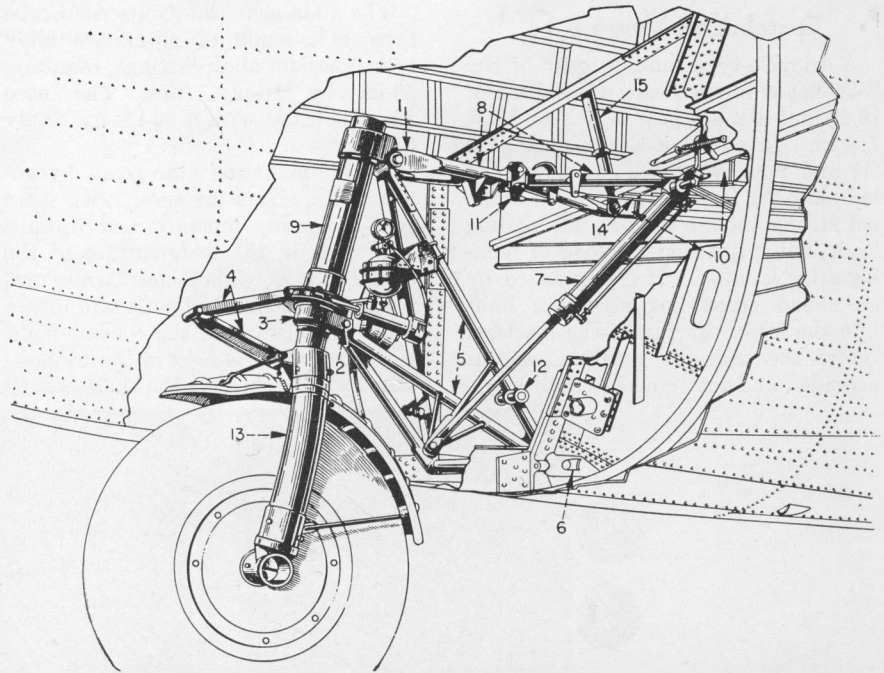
Details of the nose gear: (1) and (2) strut bolt; (3) lower collar; (4) scissor; (5) V struts; (6) pivot shaft; (7) hydraulic jack; (8) drag link assembly; (9) strut; (10) hinge shafts; (11) latch; (12) roller assembly; (13) fork; (14) latch linkage; (15) booster spring.
